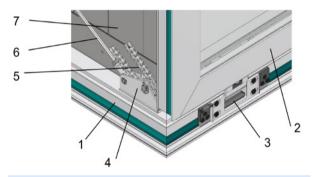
Cable chain and rod grip in the bottom sash: 1 - bottom sash; 2 - top sash; 3 - hinge; 4 - cable chain and rod grip; <math>5 - cable chain (fragment); 6 - articulated rigid rod; 7 - balustrade infill
